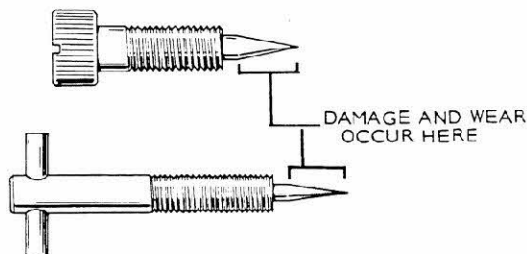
MIXTURE NEEDLE INSPECTION
